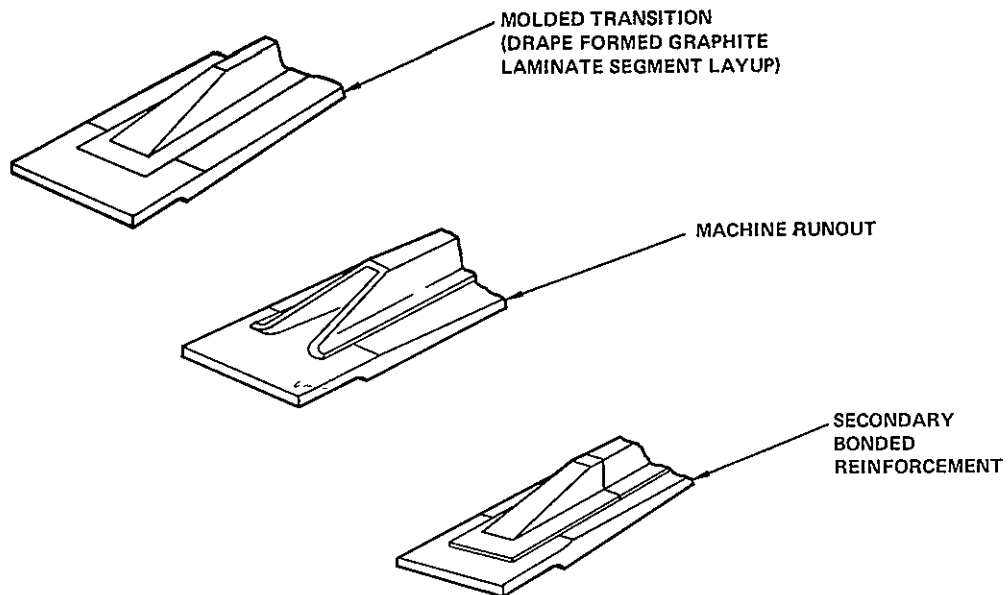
Hat Section Stiffened Skin Cover - Root End Flare Out
